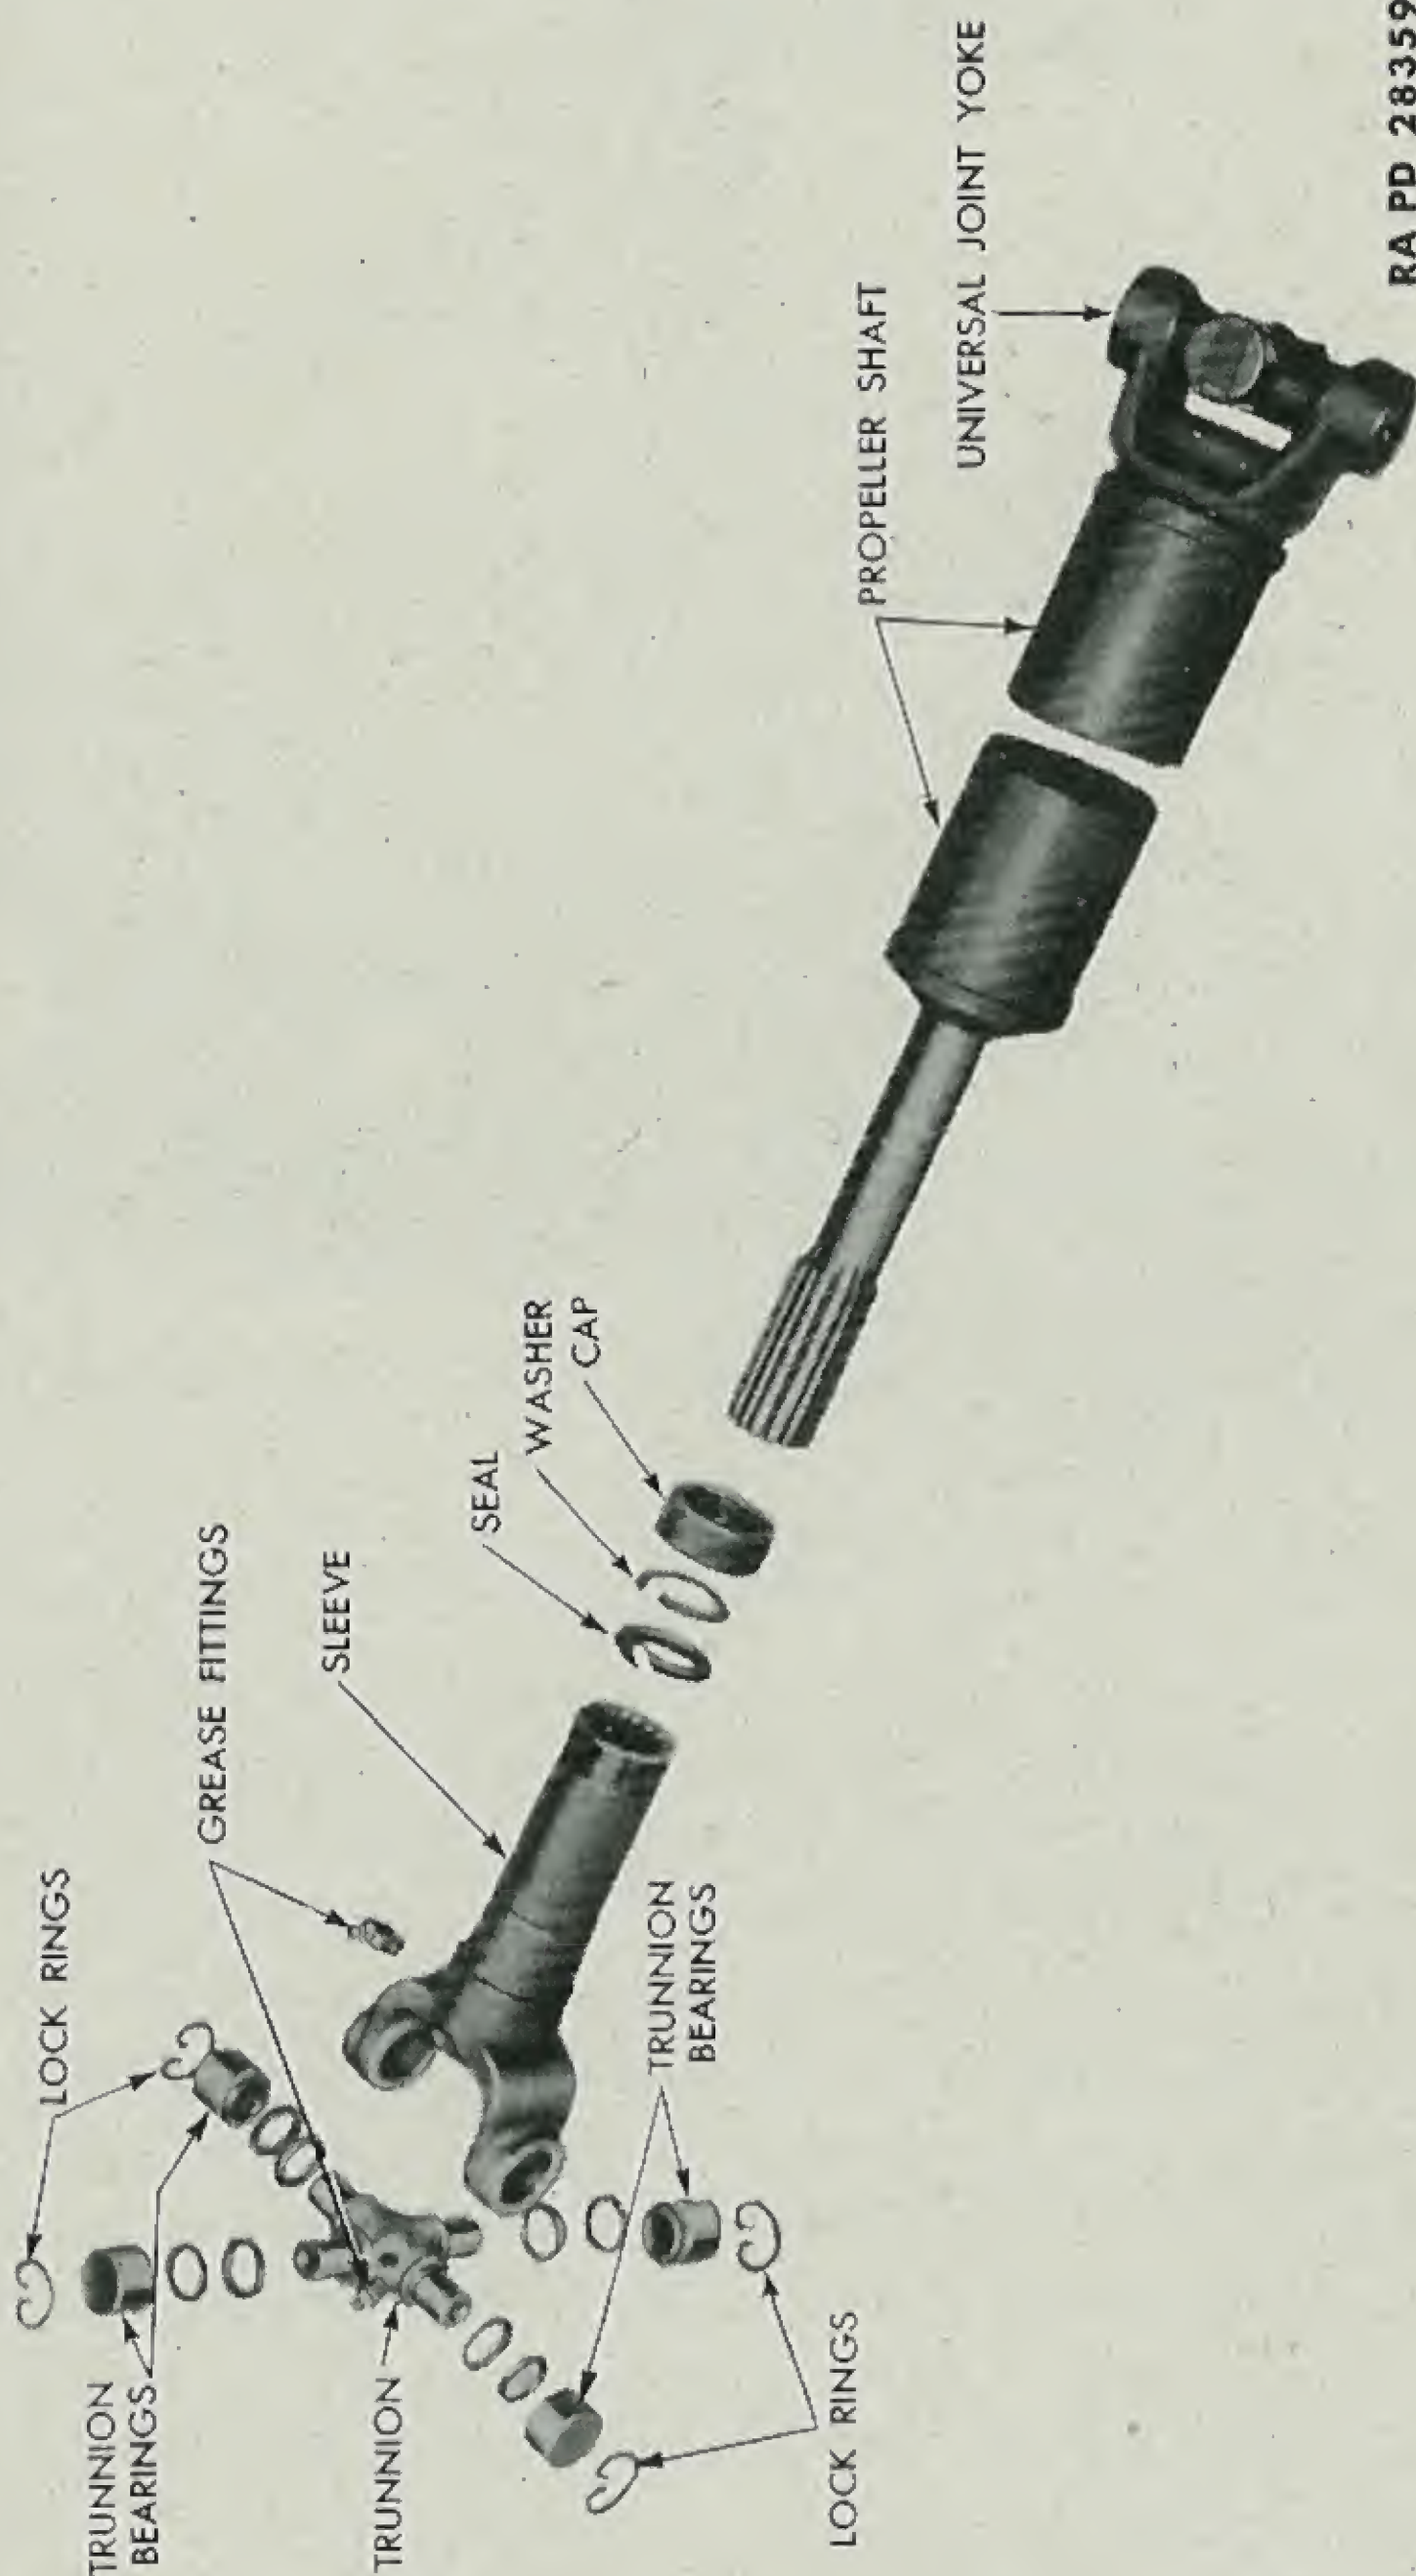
Propeller Shaft, Disassembled (U-Bolt Type)
